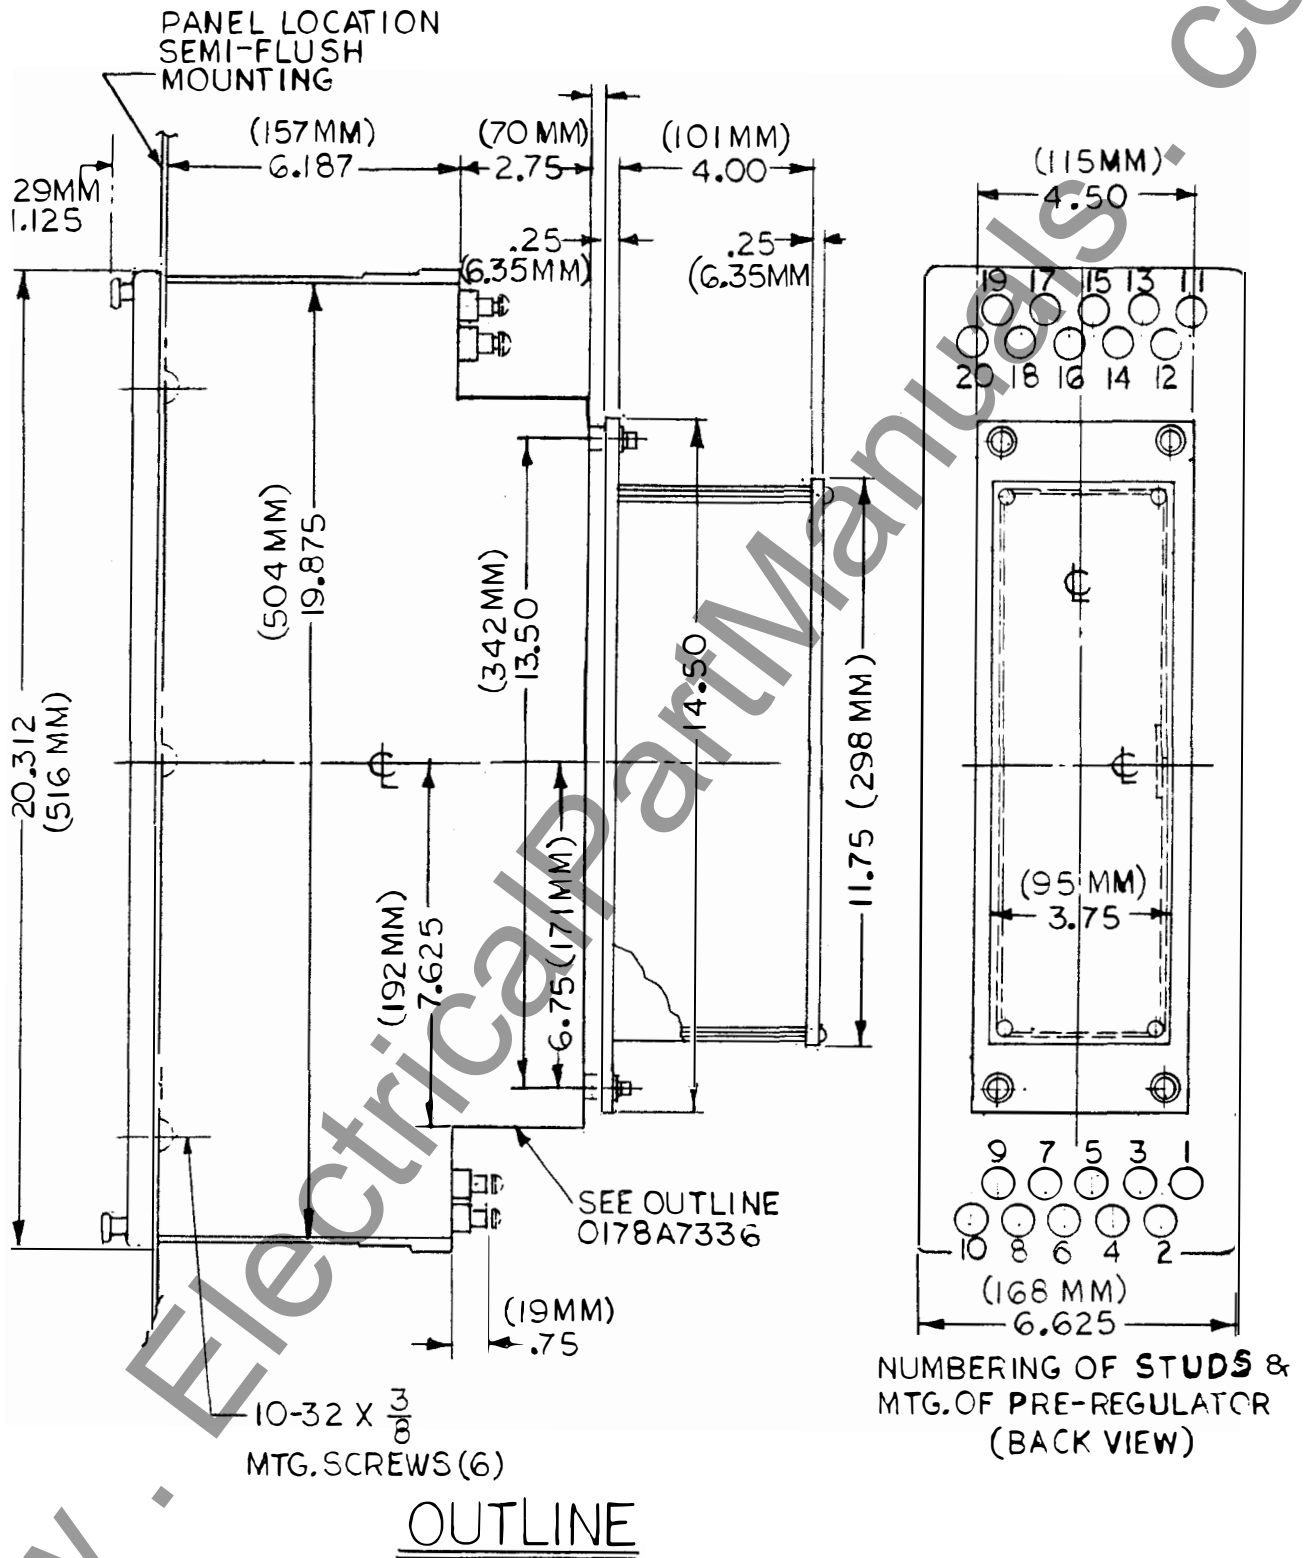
(0275A4339) Outline and Mounting Dimensions for External Pre-Regulator
